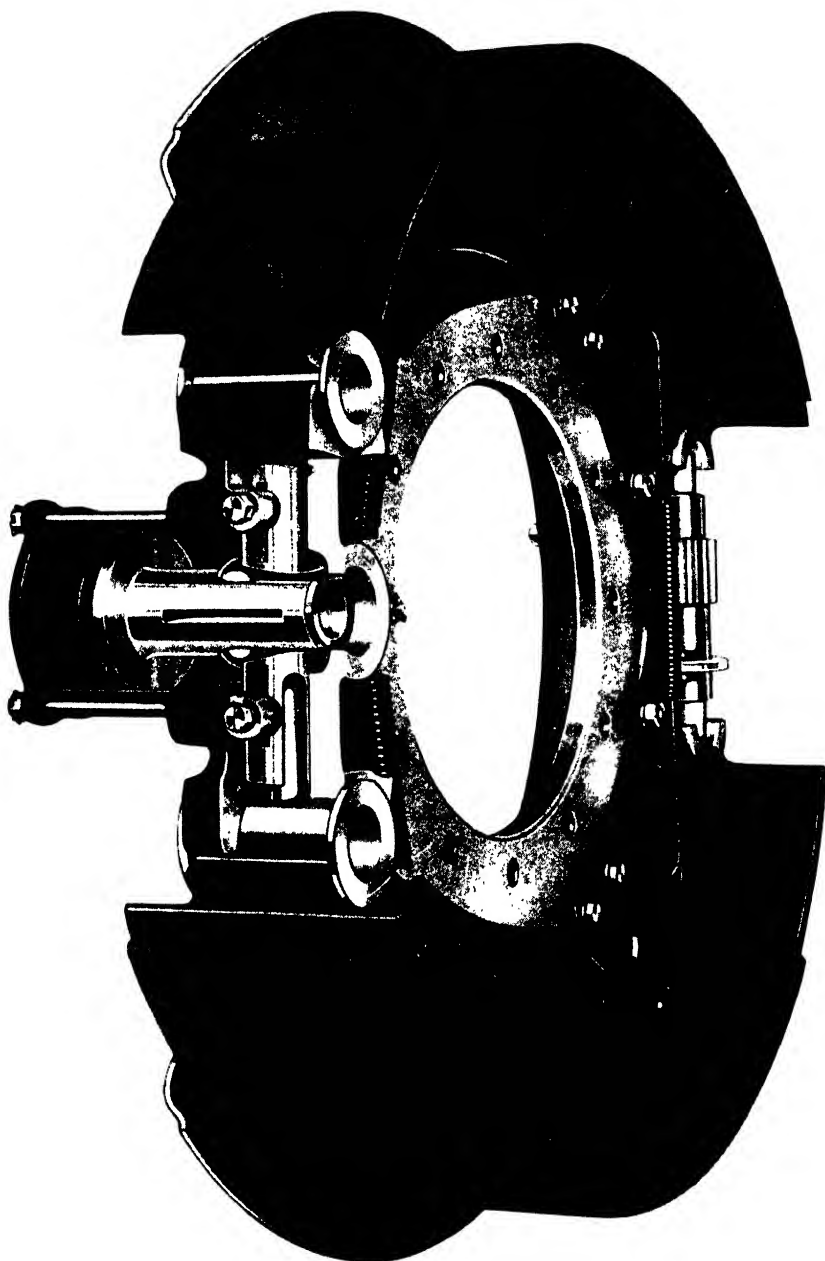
BENDIX AIRCRAFT BRAKE WITH PORTIONS OF THE TORQUE PLATE CUT AWAY TO SHOW THE OPERATING MECHANISM
